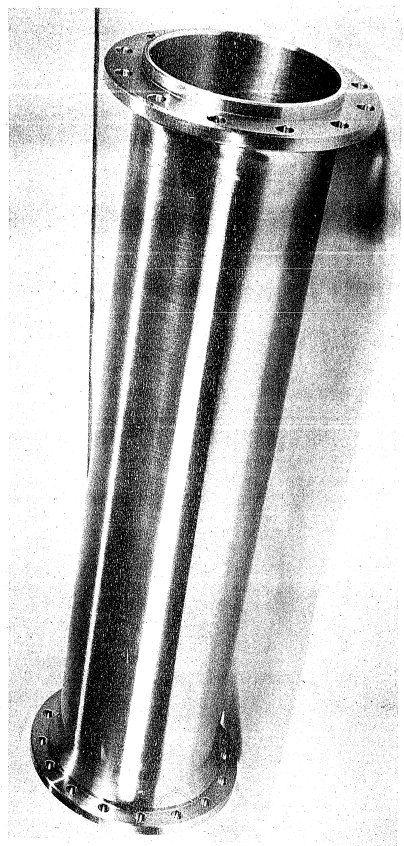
P/N 226970 - SHAFT, TURBINE ROTOR FRONT
